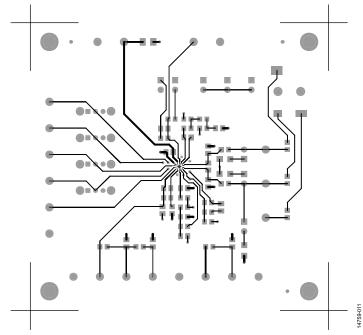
AD8233CB-EBZ Evaluation Board Primary Side, Copper
